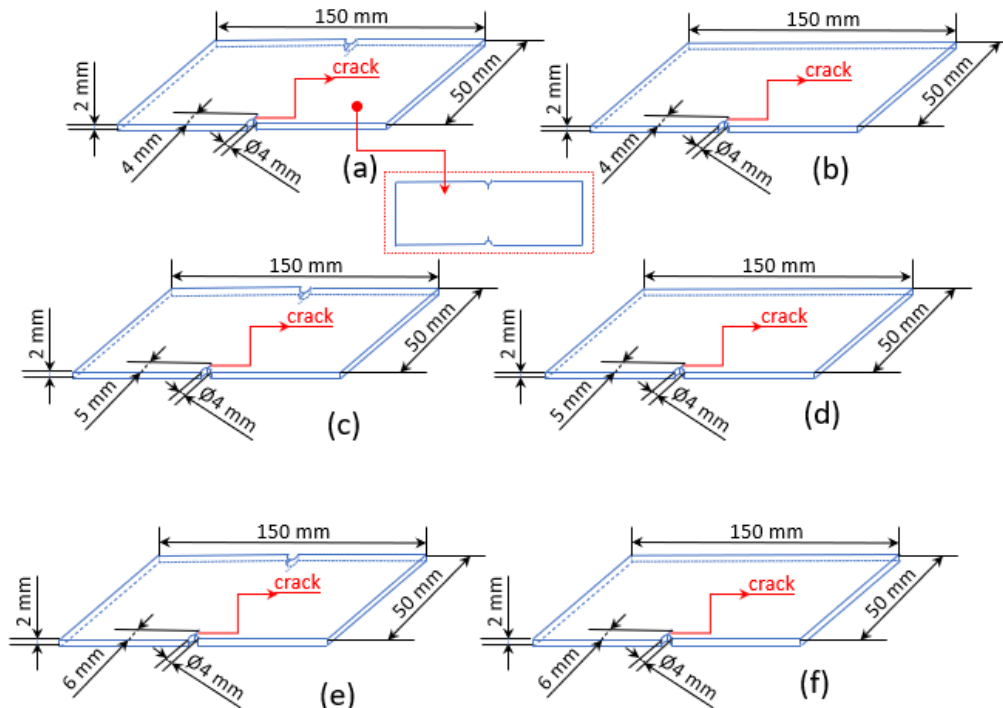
Dimensions of Al 5083 Aluminum plates with 2 mm (a, b), 3 mm (c, d) and 4 mm (e, f) cracks starting from the semi-circular notch (single and double sided).
